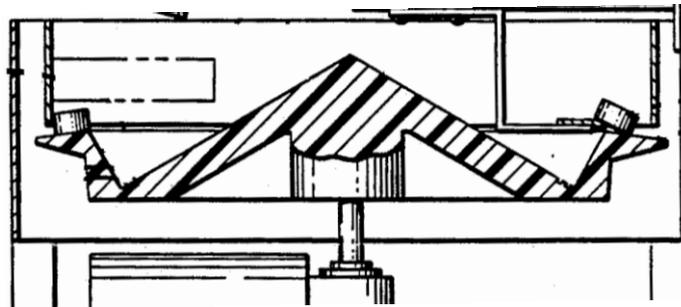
Rotary Feeder with Conical Surface with Tangential Flange [7]
